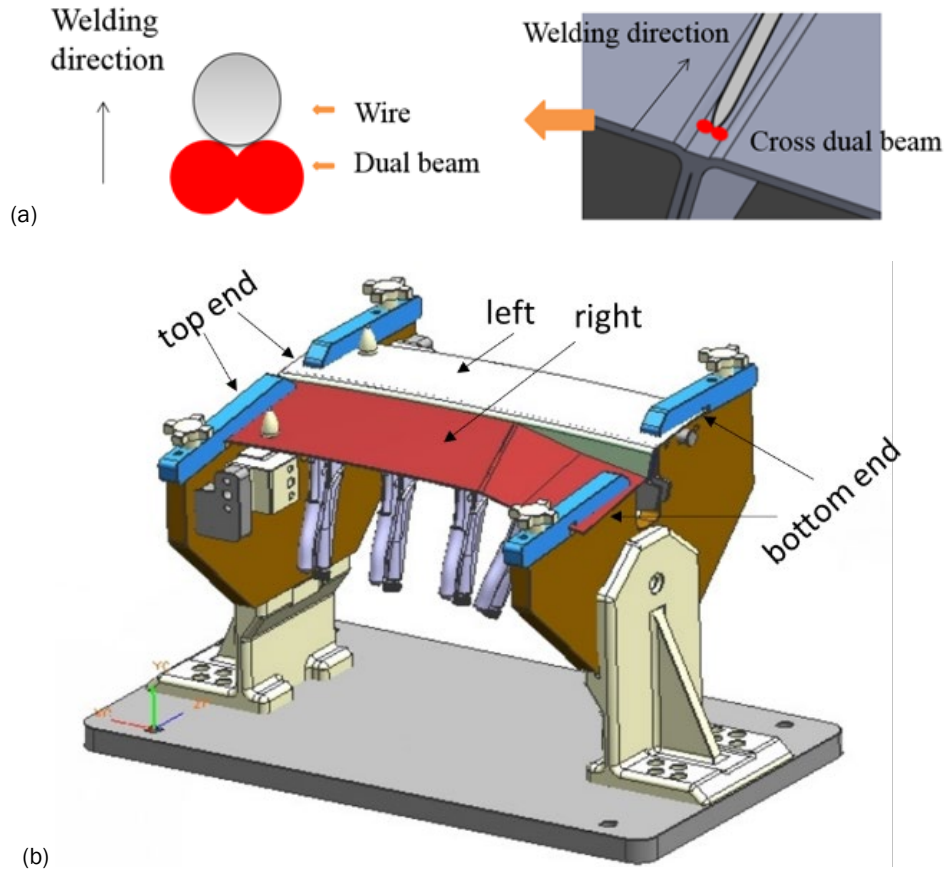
D.2. Laser beam welding of panel structure: (a) laser beam configuration; and (b) fixture setup. Source: GM.
